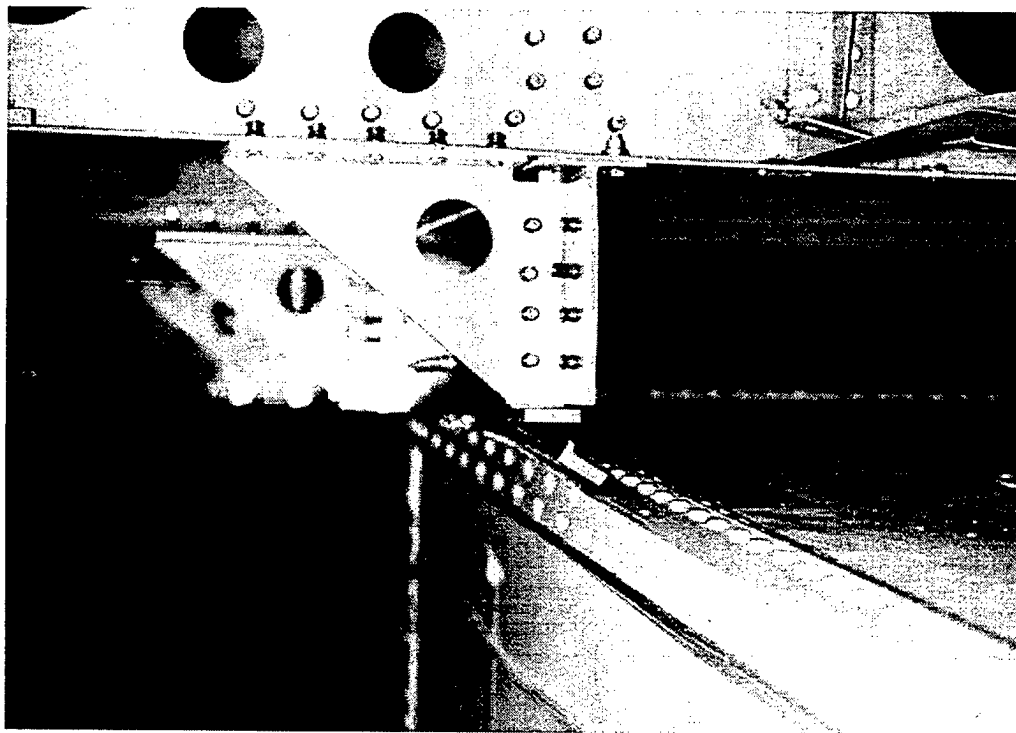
POSTTEST AUXILIARY FUEL TANK RIGHT ATTACHMENT FRAMEWORK FRONT VIEW 1
